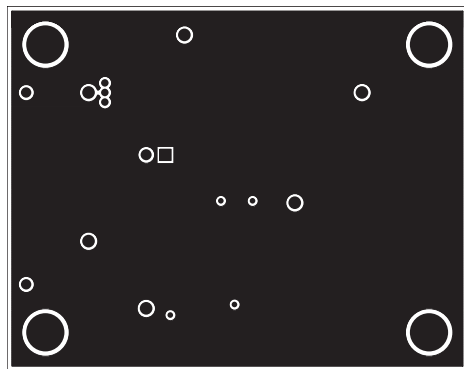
MAX16977 EV Kit PCB Layout—Layer 2
